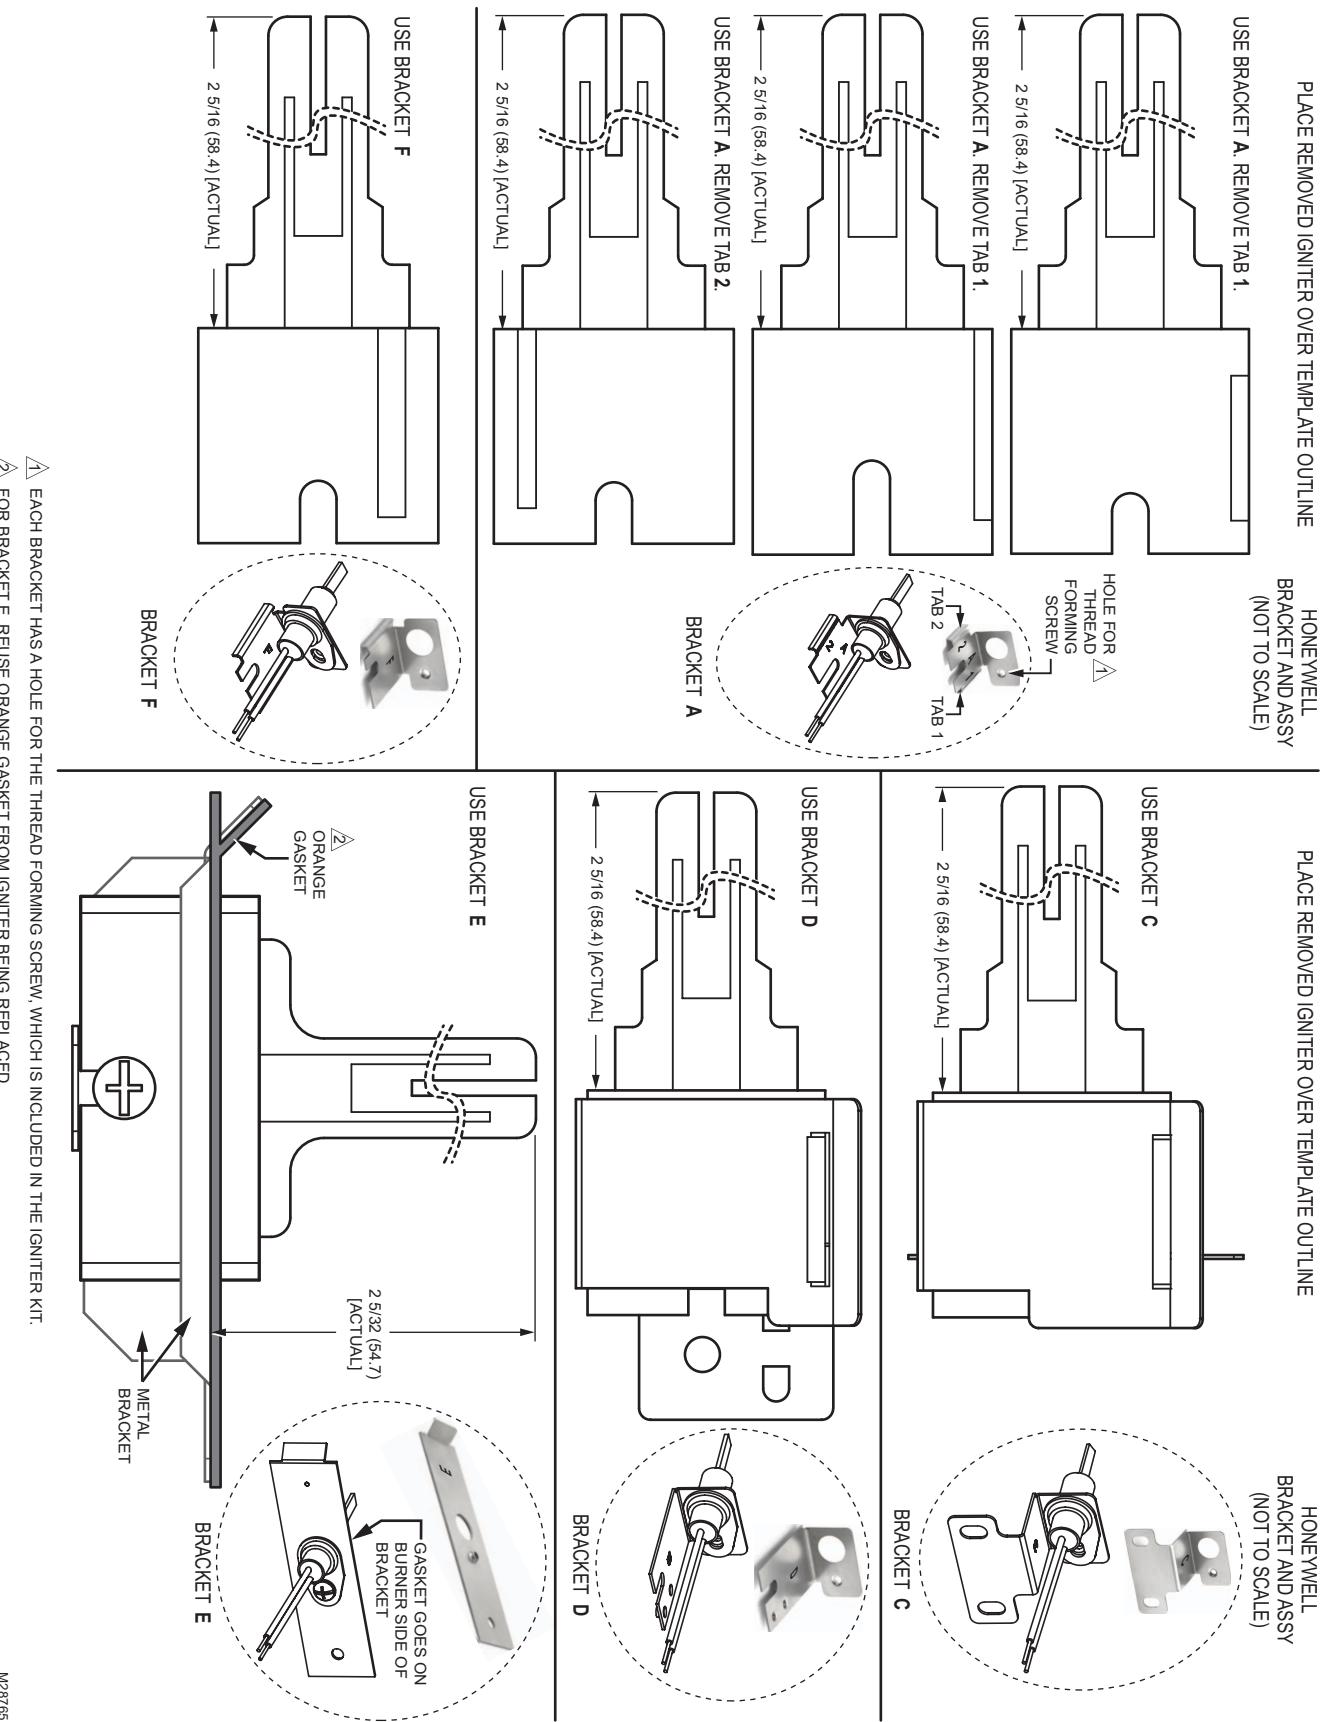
Igniter brackets A, C, D, E, and F template; dimensions in in. (mm).
